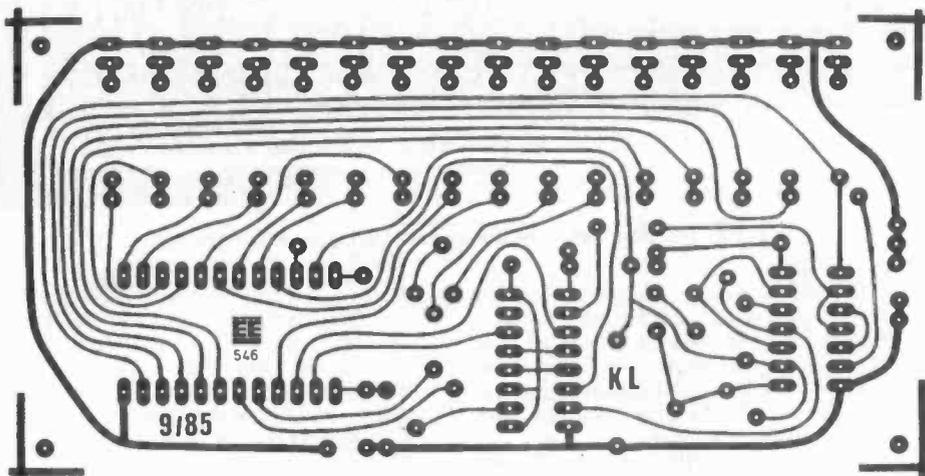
Full size printed circuit master pattern for the Chaser Light.
